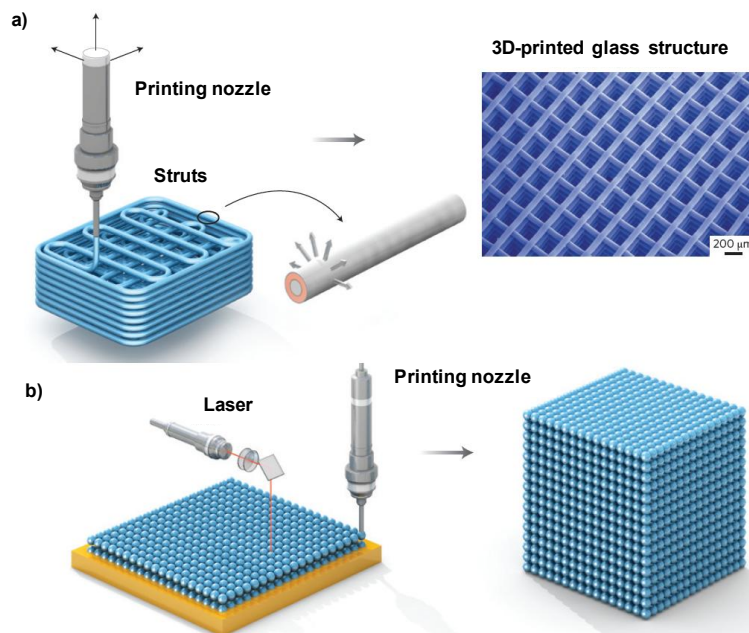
Scheme of additive manufacturing (Robocasting) [88].
